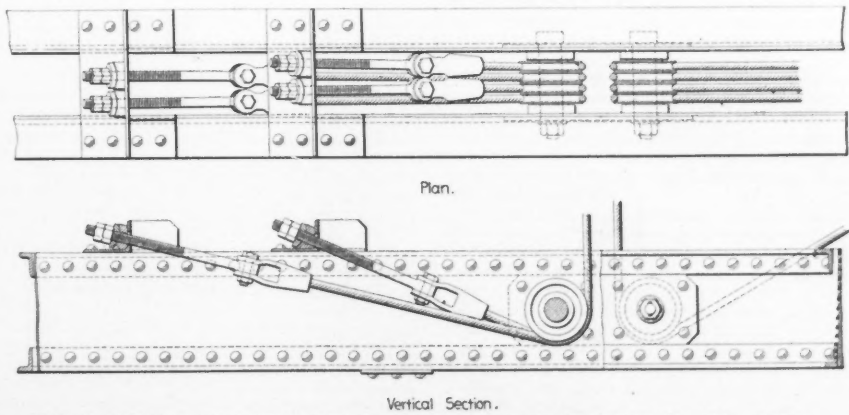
METHOD OF ATTACHING CABLES TO THE FRAMING OF ALL CARS.
